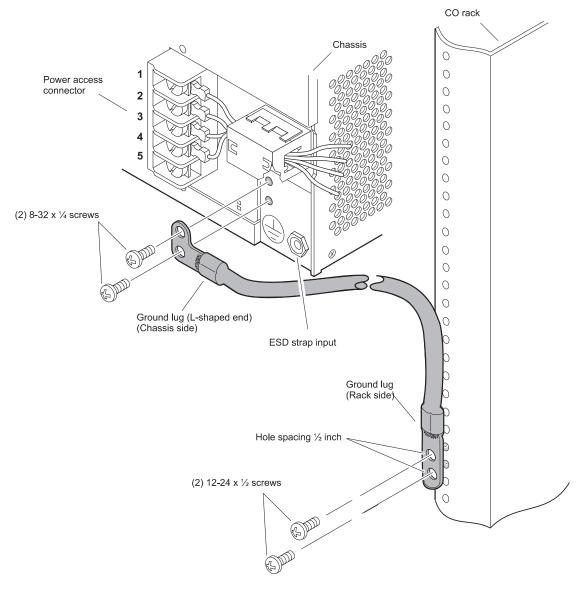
Grounding the Chassis (Right-Hand Side, Rear View)
